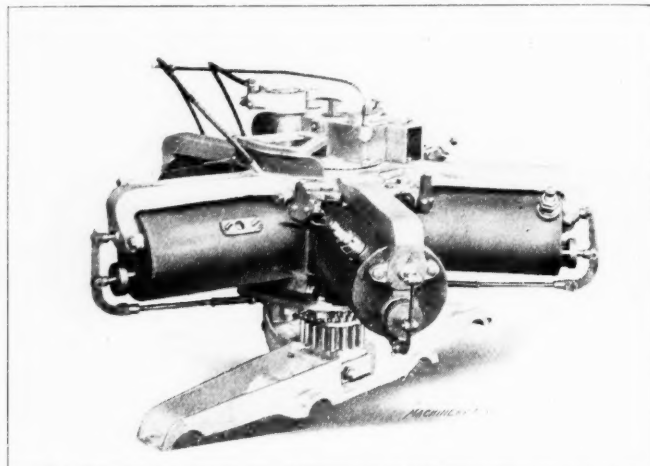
Side View of Five-cylinder Motor, showing Spider for Attaching to Frame.
